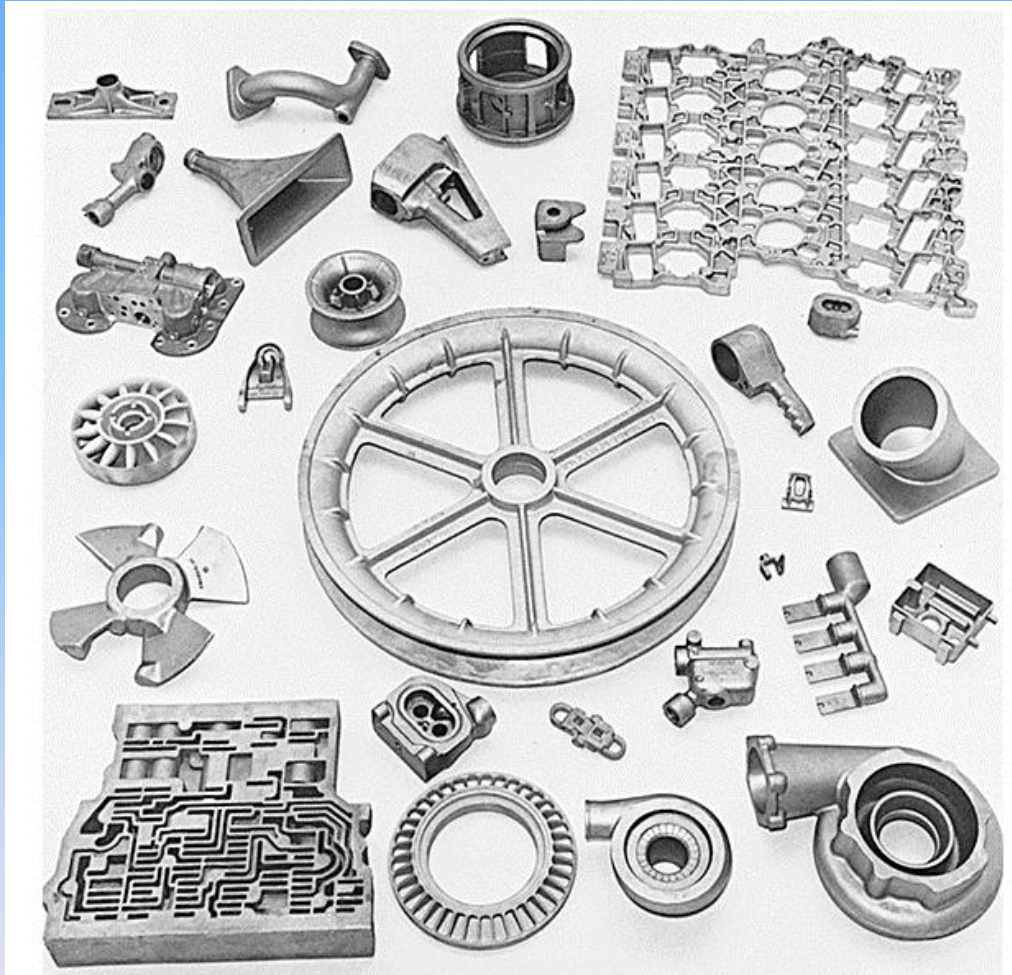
A variety of sand cast aluminum parts. (Courtesy of Bodine Aluminum Inc., St. Louis, MO)
